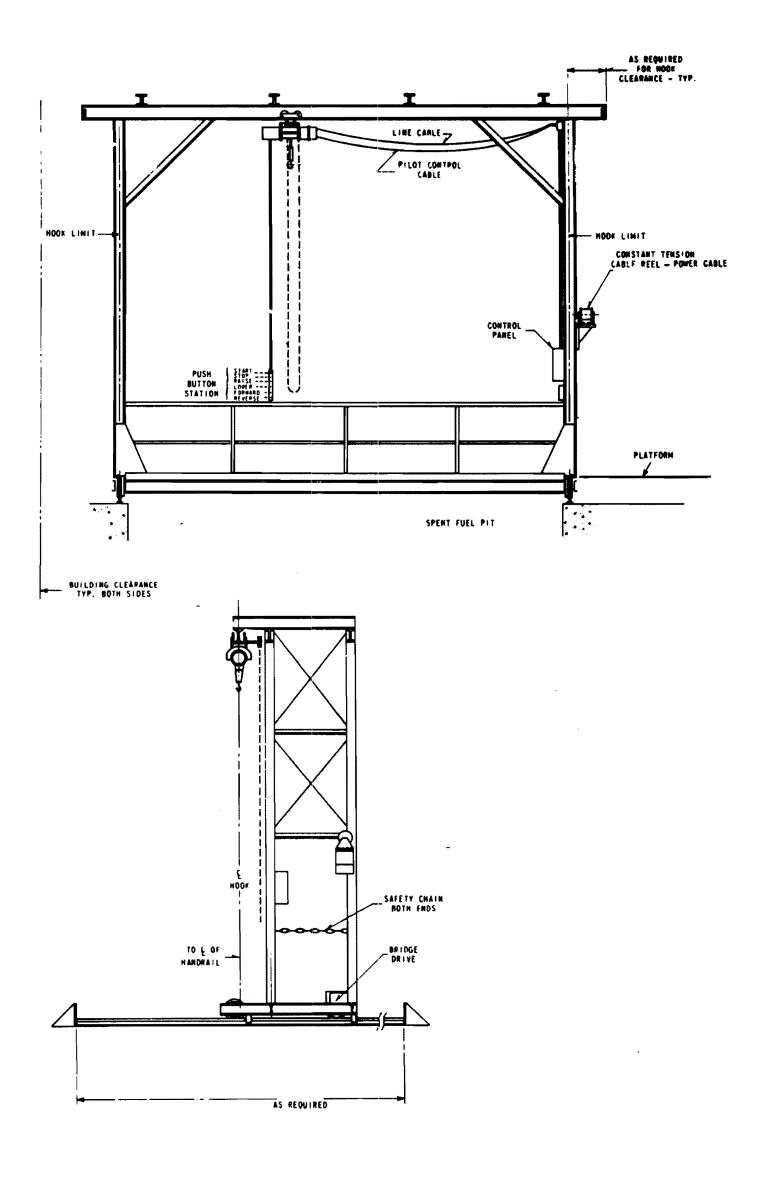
Typical Spent Fuel Pit Bridge
